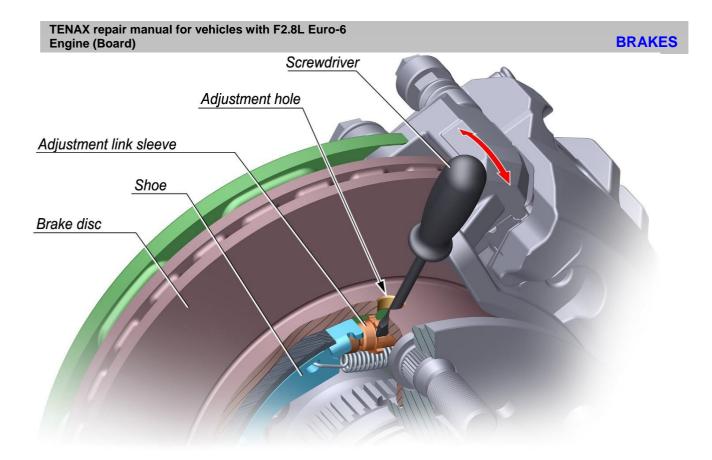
Parking brake adjustment (without removal of hub with brake disc)
